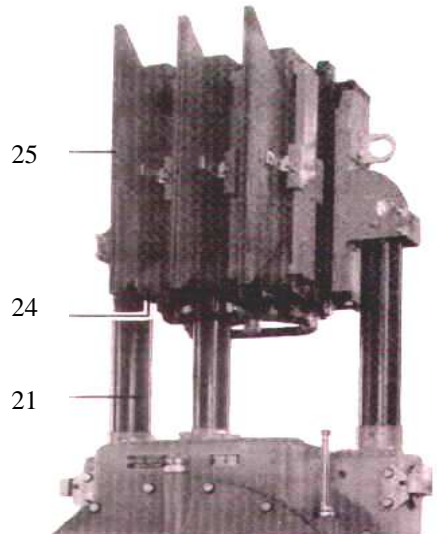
CIRCUIT BREAKER ASSEMBLY
